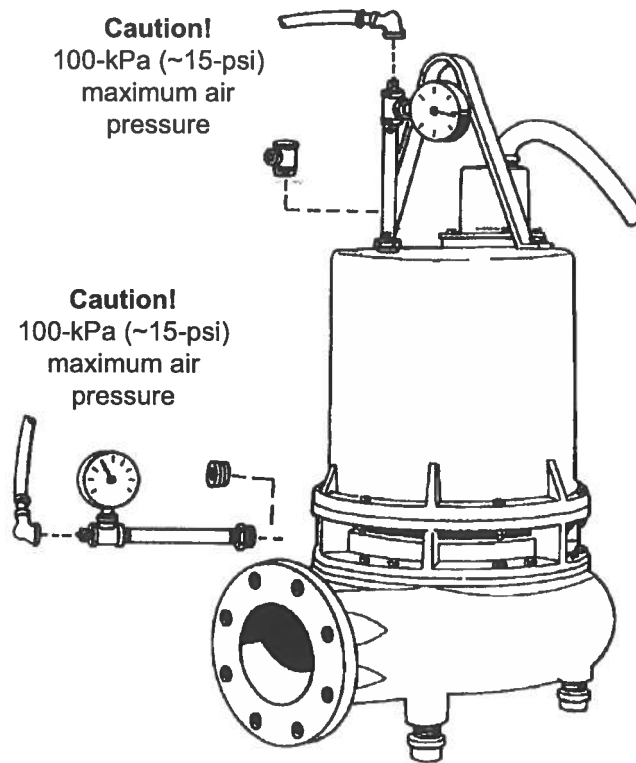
Submersible motor integrity test setup using housing pressure test method
